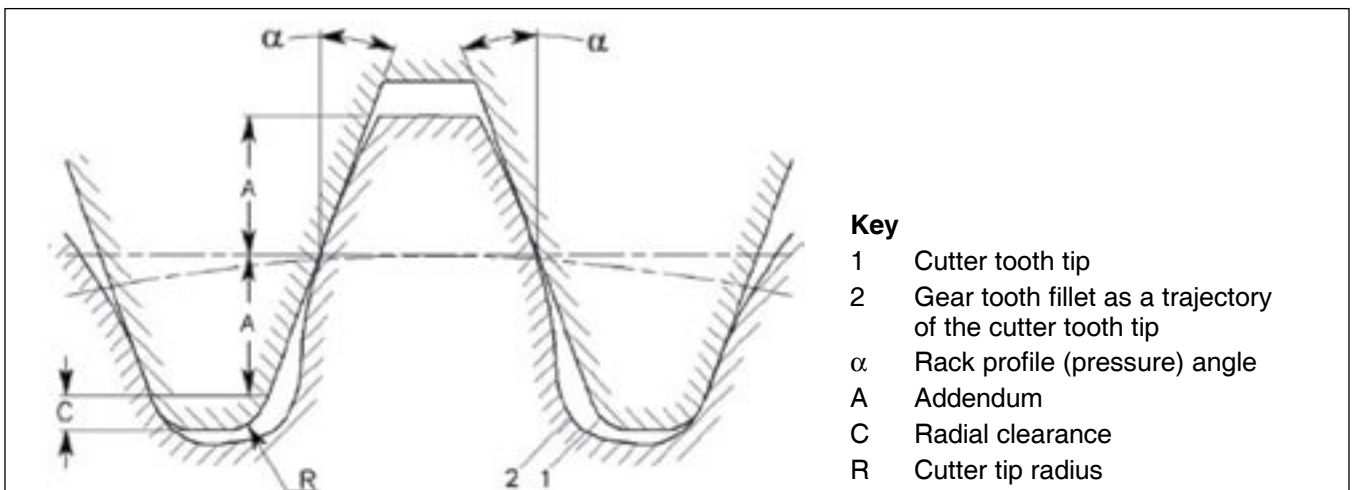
Gear tooth fillet generation by the rack cutter (gear hob).
